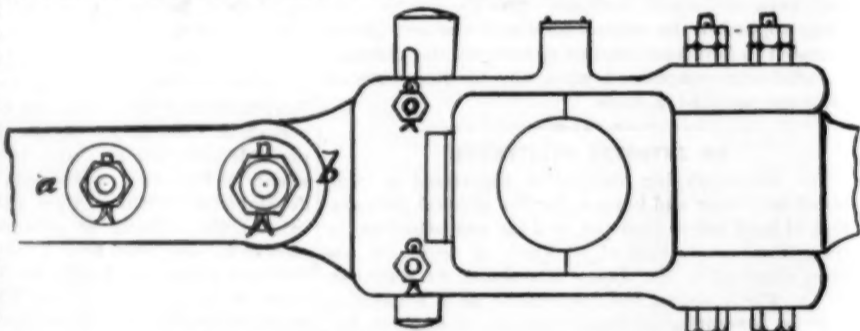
COUPLING ROD OF AN ITALIAN LOCOMOTIVE.
